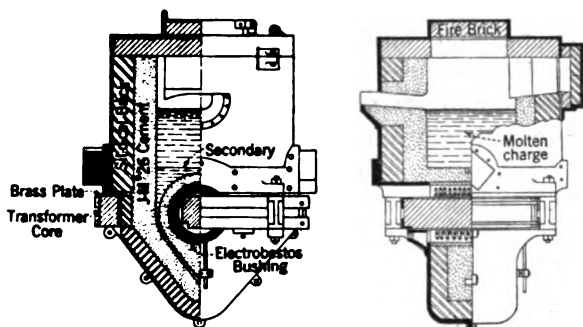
SECTIONAL VIEWS OF THE FURNACE
